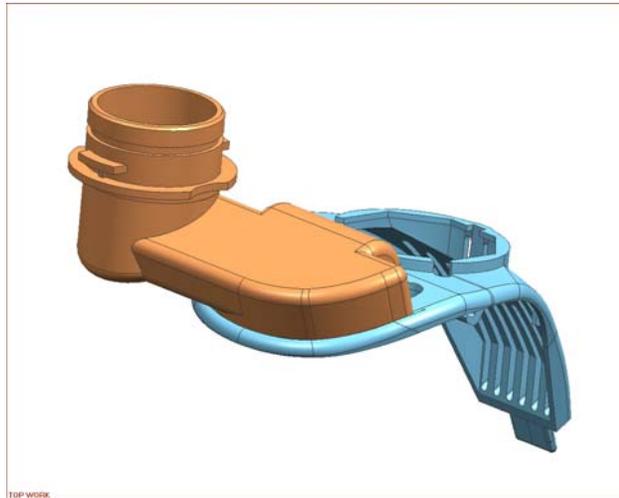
Various Views of Prototype SCBA Interface Component
